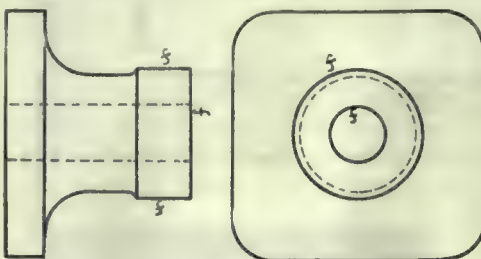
PIECE FOR WHICH TOOL SHOWN IN FIG. 2 WAS DESIGNED.
